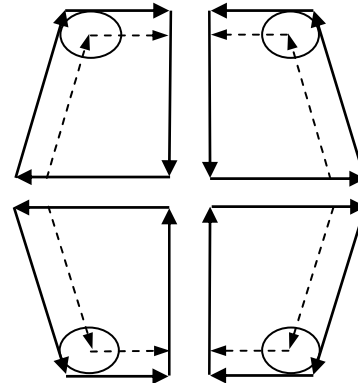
Offset direction of tool nose radius compensation in G94
